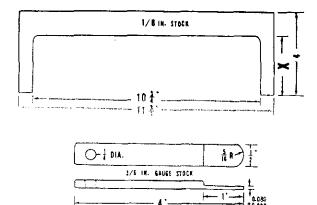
Using special tool to adjust the dual plate clutch release lever height. Adjustment must be made with a NEW 11-inch driven disc installed.
